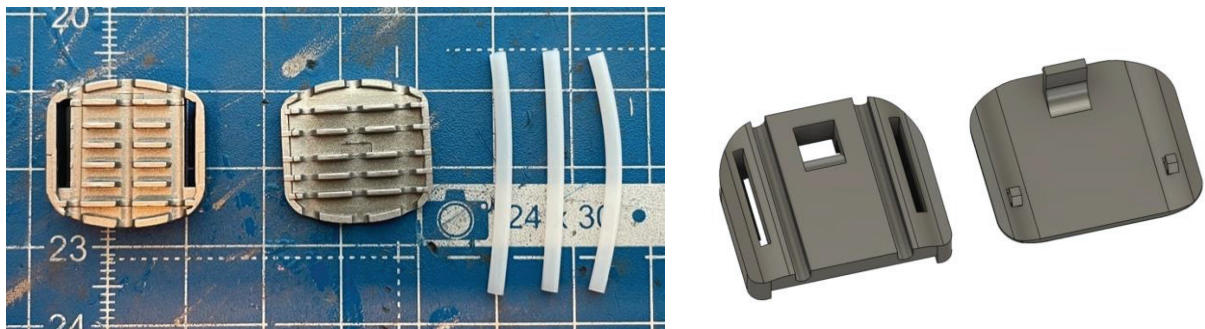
Left: Old cable guides parts, fastened using glue. Right: envisioned concept parts, using snap fits to fasten the halves. Note the lack of a third channel for the stringpot cable. This is due to the cable guide concept functioning more as a proof of principle which SenseGlove could develop further, rather than a functional part.
